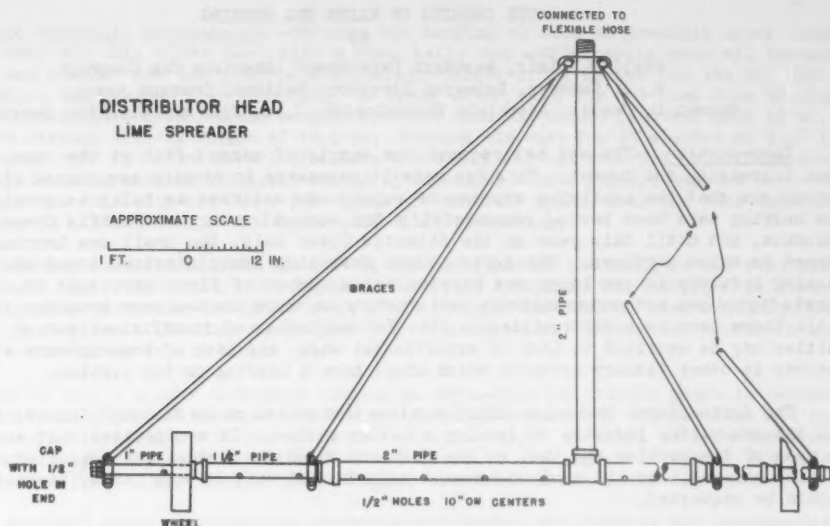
DISTRIBUTOR HEAD IS ATTACHED TO FLEXIBLE HOSE LINE (Fig. 1, K) AND ROLLS ON BOTTOM. LIME IS DEPOSITED THROUGH THE 1/2" HOLES SHOWN IN THE DIAGRAM.
